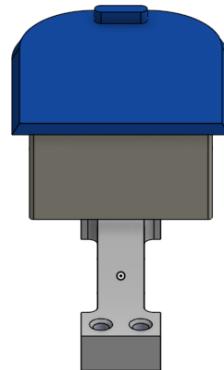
Sample Box and Load Cell Assembly (Front View)
